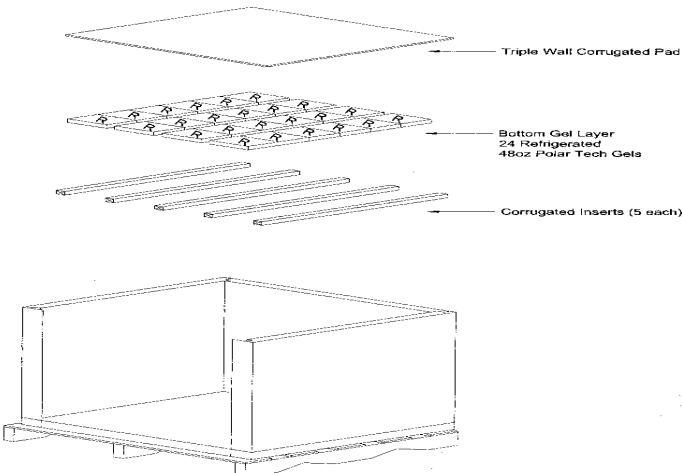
Bottom Gel layer, Spacer, and Pad Assembly
